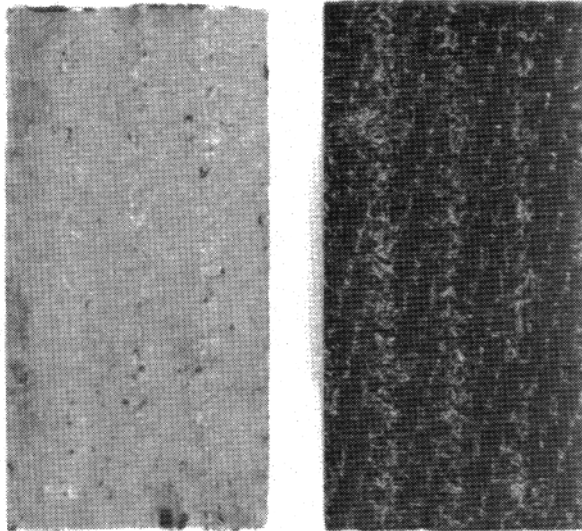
Tested ILT Specimens Showing Adhesive Failure
